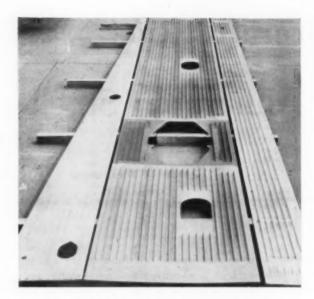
This lower inner wing panel for a Super Constellation weighs 3300 lb in the original plate and about 390 lb when finished.
